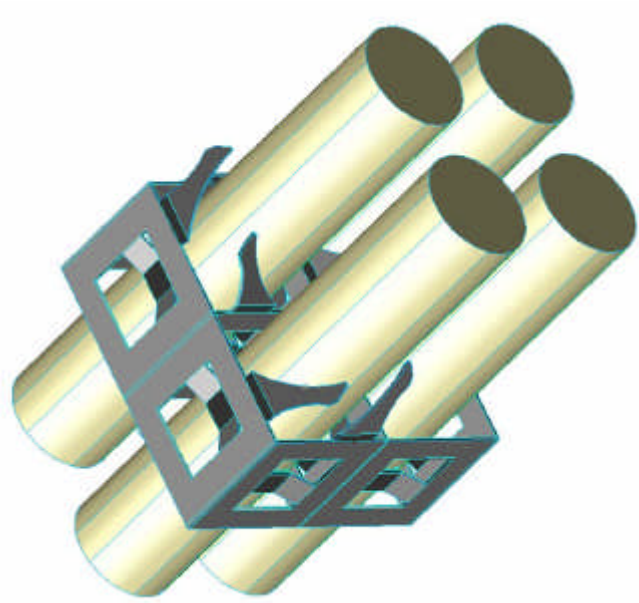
Geometry Model of Fuel Rod and Spacer Grid Assembly
